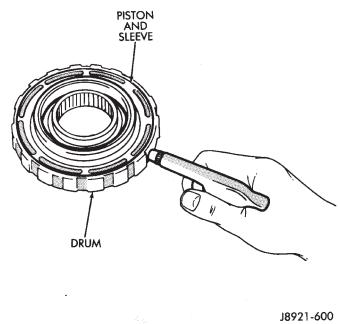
Removing/Installing Piston And Sleeve ASSEMBLY
